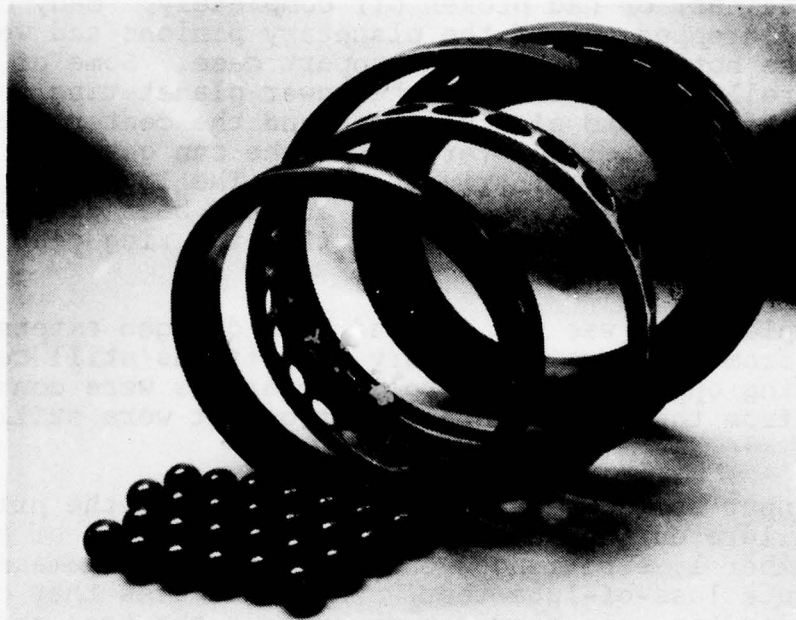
Main gearshaft duplex bearing after 21-minute loss-of-lube retest of transmission number 1.
